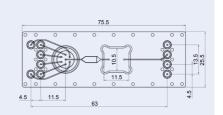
Schematic drawing of turning valve sensor platform II Fluidic 1156
